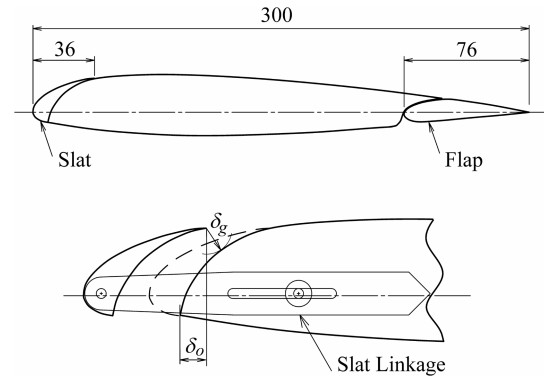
Configuration of three-element wing model (dimensions in millimeters).
